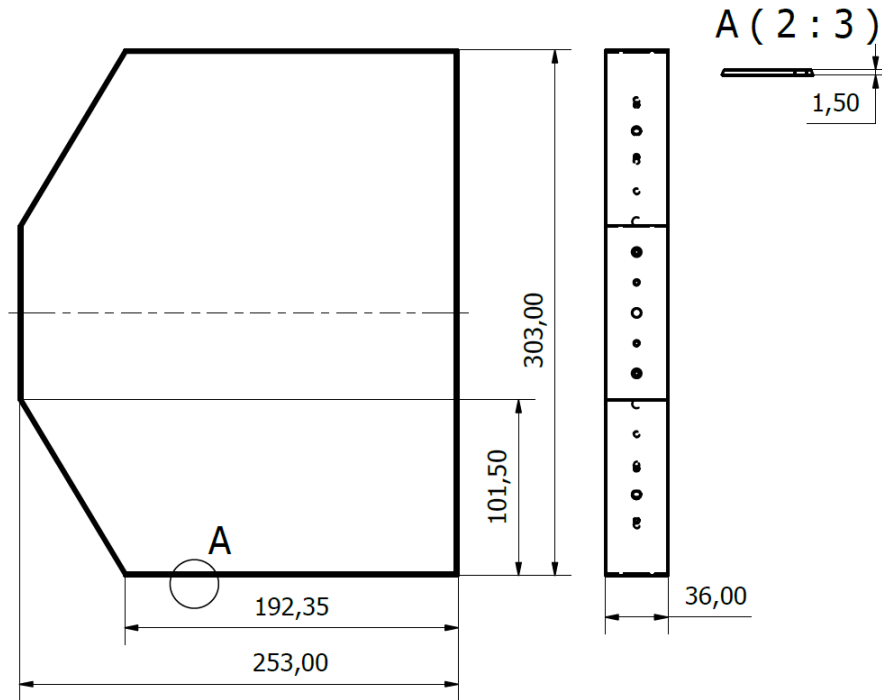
D-shape Mirnov coils support dimensions diagram in millimeters.
